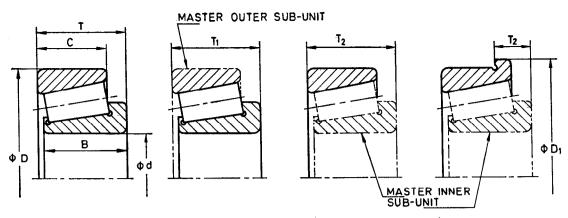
SYMBOLS FOR TAPERED ROLLER BEARINGS
